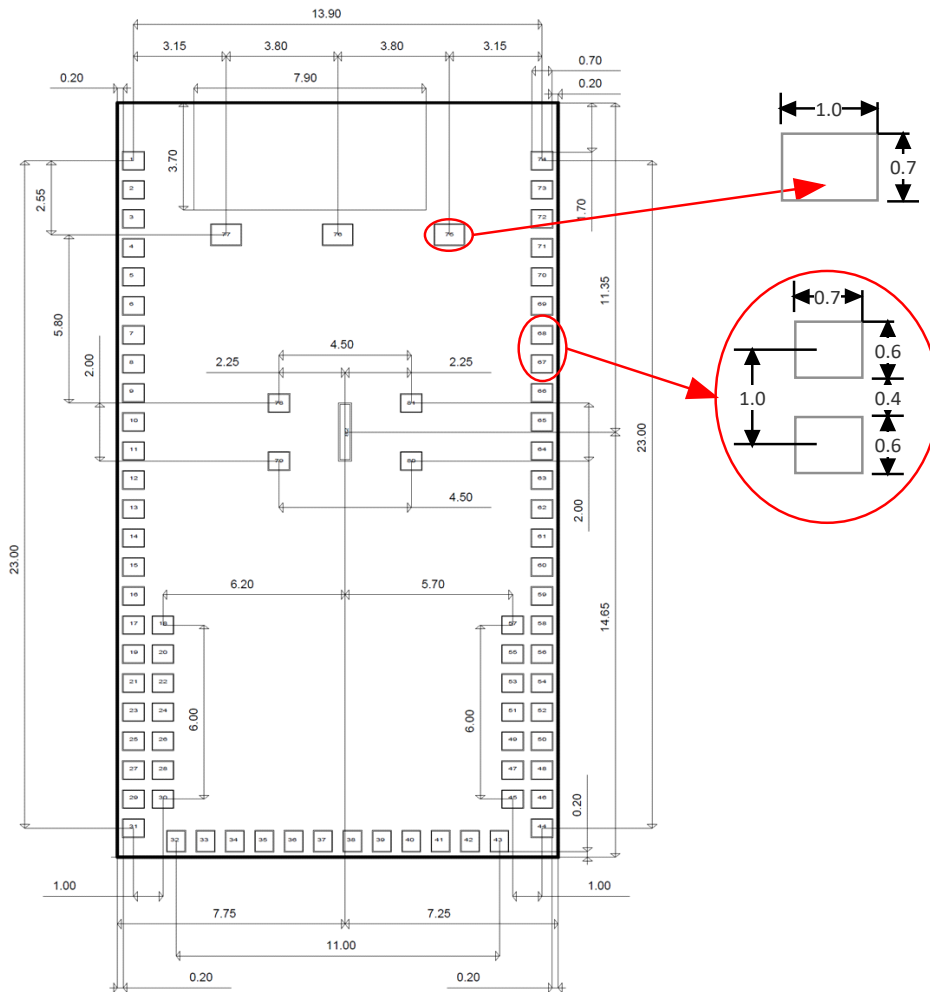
ARTIK 055s Module Mechanical Dimensions (Top View)
